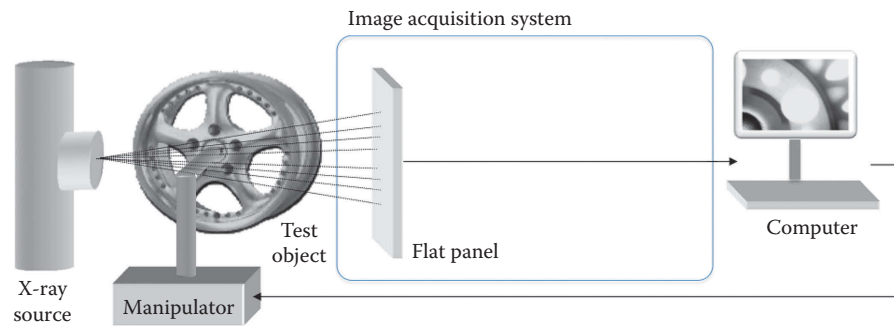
X-ray testing system. The image acquisition system is based on flat panels. In this example, an aluminum wheel is inspected using a manipulator
